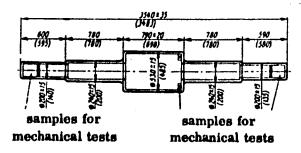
Sketch of rotor forging (snagging contour) indicating the sites from which samples were taken.
